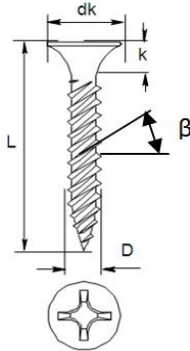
Explanatory drawing for the invention of “Self-threading screw”. No dimensions are given in accordance with the lawful provisions. It can refer to any combination of dimensions L x D x dk x k.
